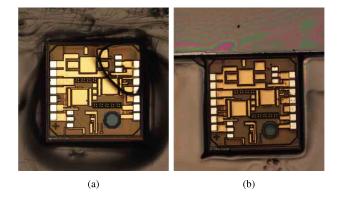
Resist spinning on 180 nm die: (a) Beading without abutting die (b) Reduced edged beading with abutting and off-center spinning.
